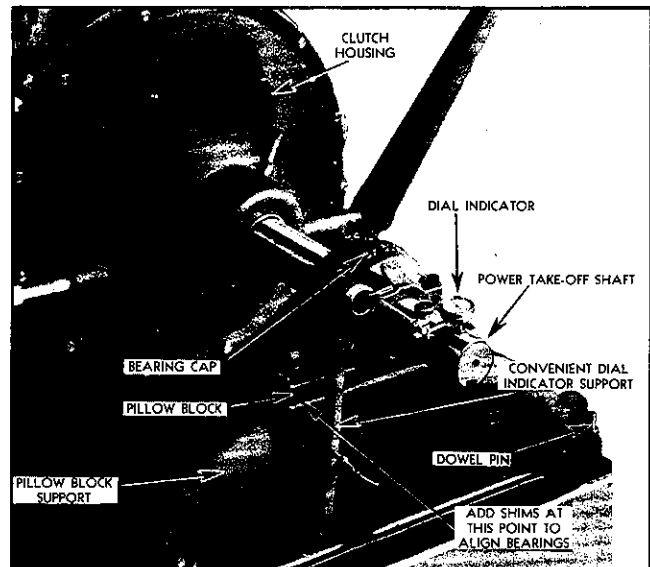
Indicating Outer End of Power Take-off Shaft for Bearing Alignment.
